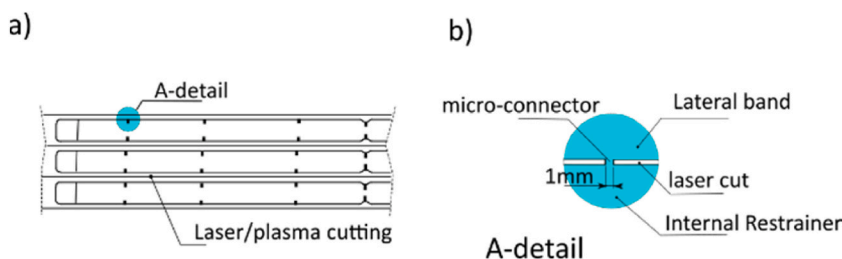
Core and IR manufacturing: a) cutting layout, b) micro-connector detail.
